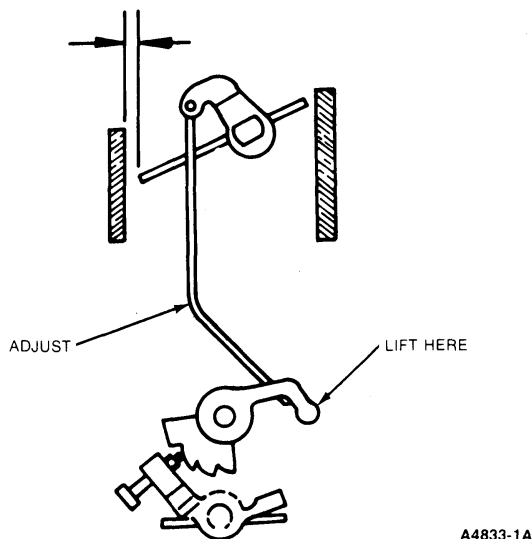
Fast Idle Cam Setting—Holley 4180 C-4V (Hot Air with Electric Assist) Carburetor
